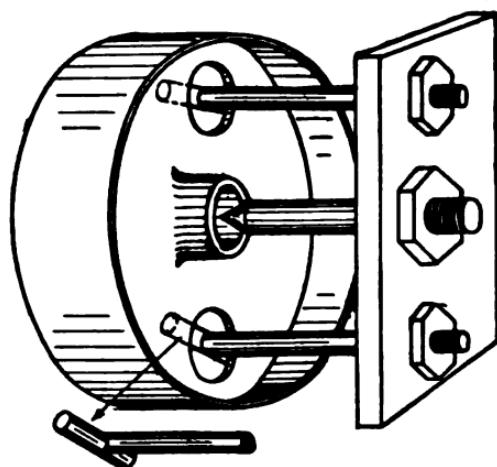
Simple Rigging for Removing Ford Clutch Disk
